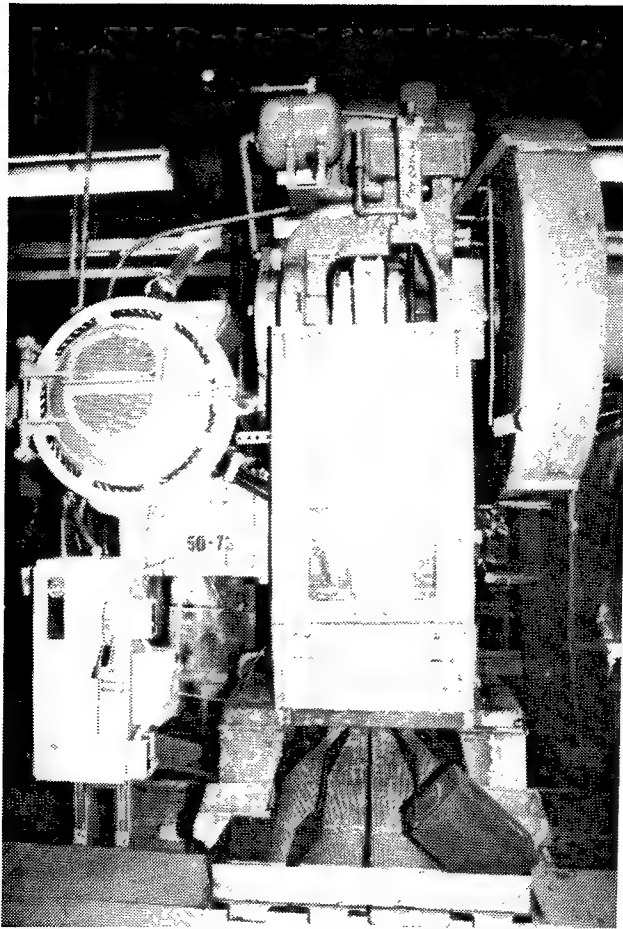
Building 4: Final Case Draw Machine manufactured by E. W. Bliss Co.
